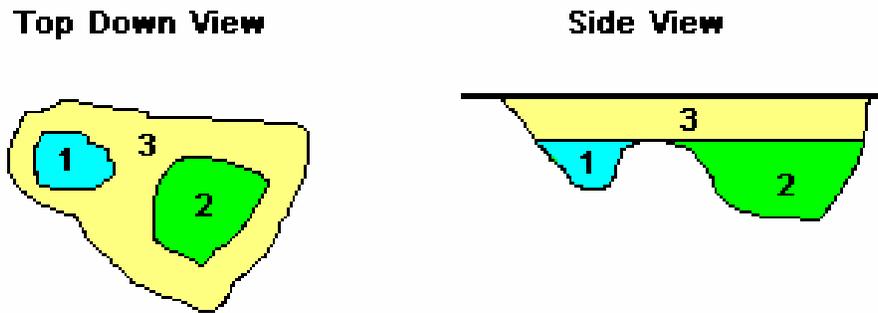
Weld Deposition Layers for Corrosion Pits
